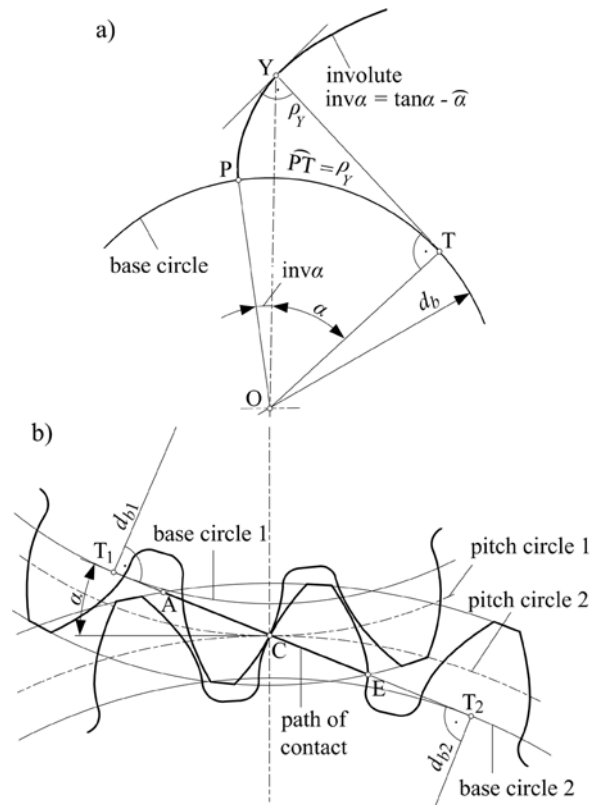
Involute gears; a) the formation of an involute, and b) meshing of teeth
